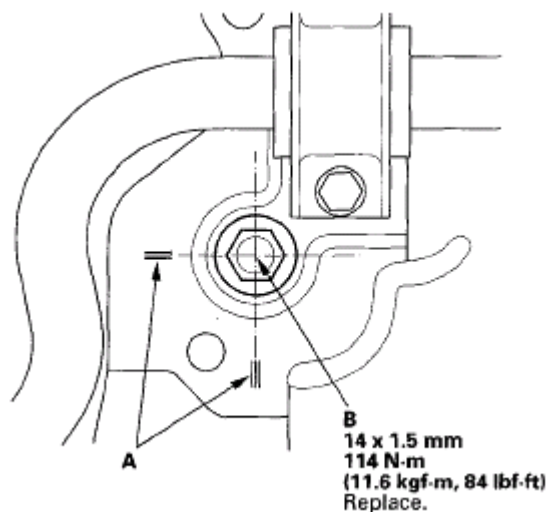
Aligning Reference Marks With Center Of Subframe Mounting Bolts (With Torque Specifications)
